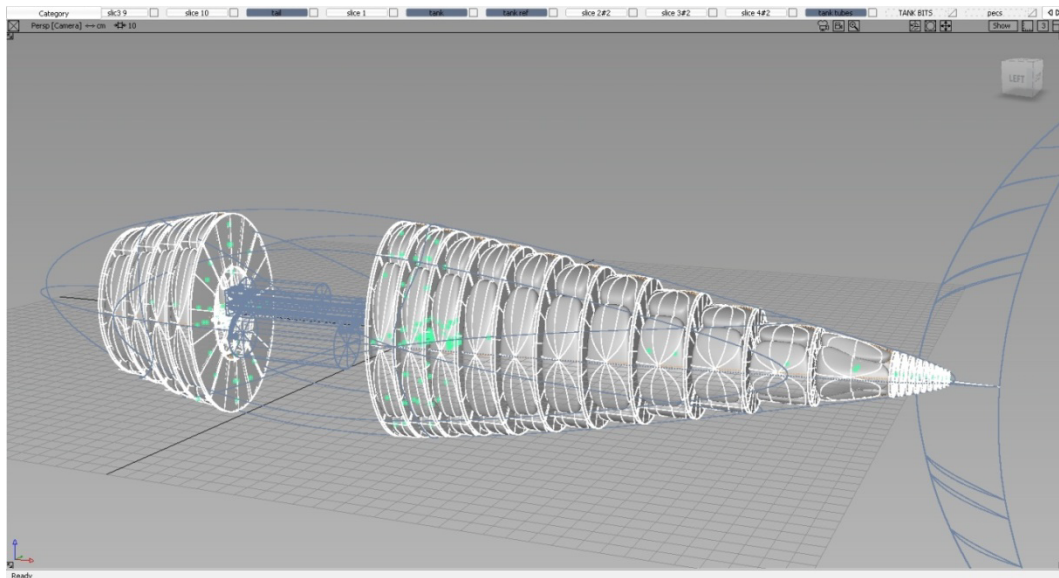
Hydraulic Pressure Feed Pocket Drive System- Rear profile view.
